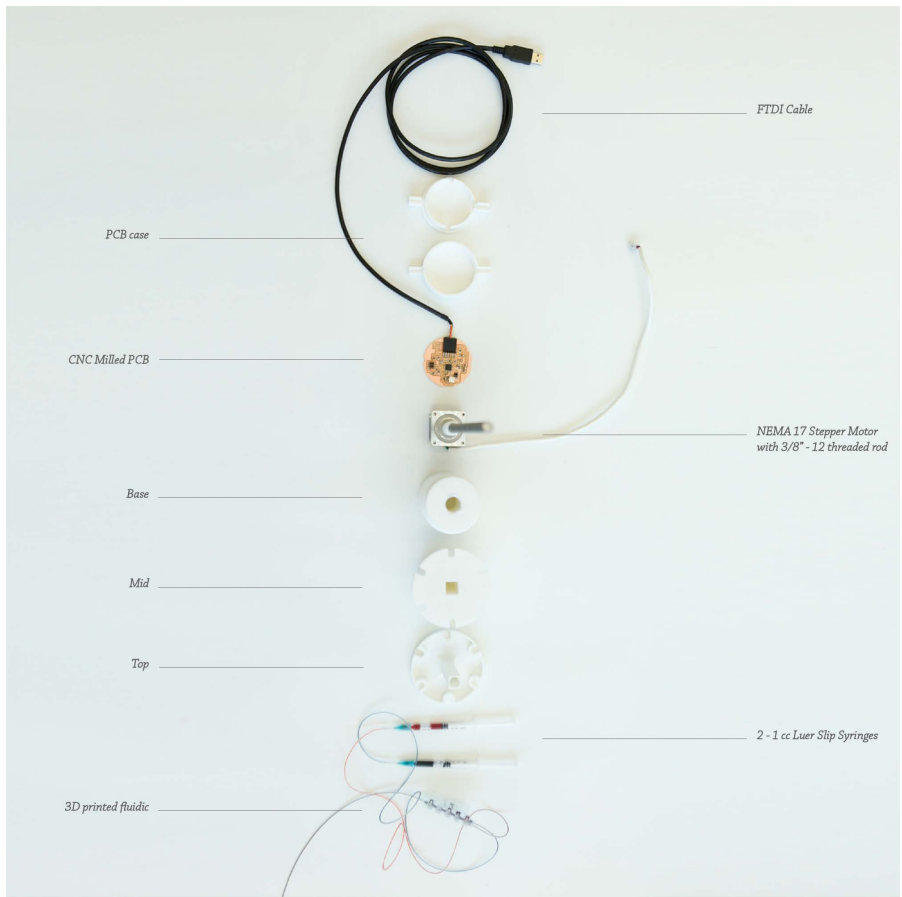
Syringe pump components. From top to bottom: USB-FTDI cable; 3D printed circuit board case top and bottom (optional); Milled electronic control board; Bi-polar stepper motor, threaded rod & 3D printed adapter; 3D printed base; 3D printed mid-section; 3D printed top; 2-1cc syringes with 23 gauge luer lock 1/2 inch dispensing needles connected to 3D printed fluidic device using 0.060 in OD Tygon Microbore tubing. Photo credit: Che-Wei Wang & Taylor Levy
